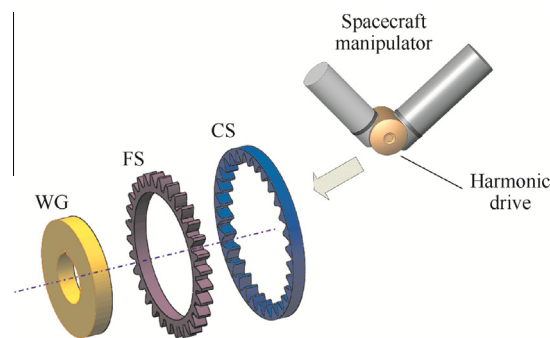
An exploded view of a harmonic drive used in a spacecraft manipulator.
